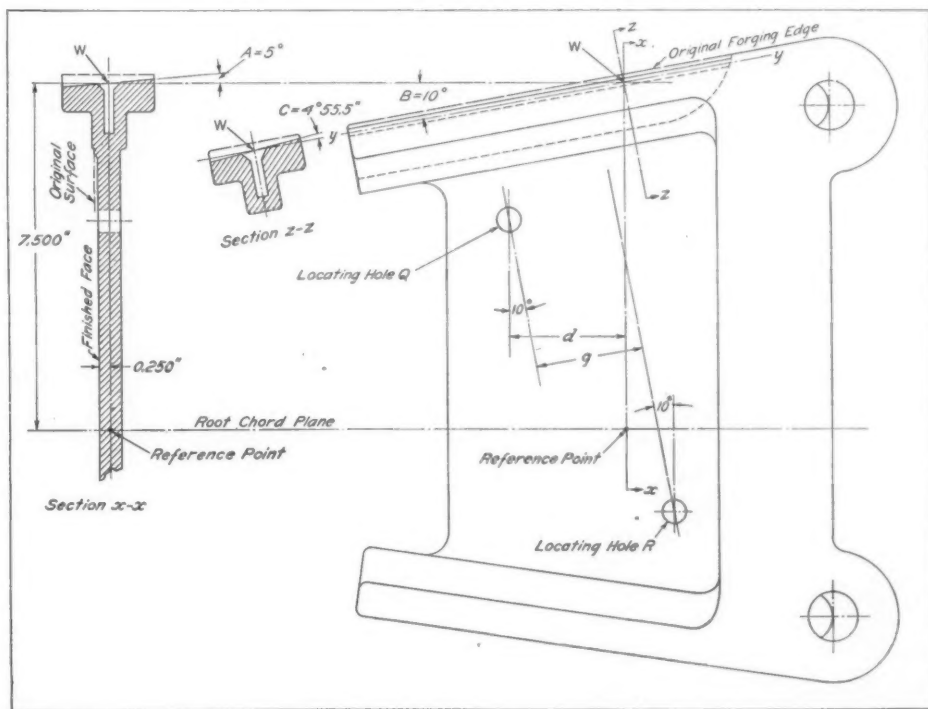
Airplane-wing Hinge Forging, Showing Compound-angle Surface to be Machined
